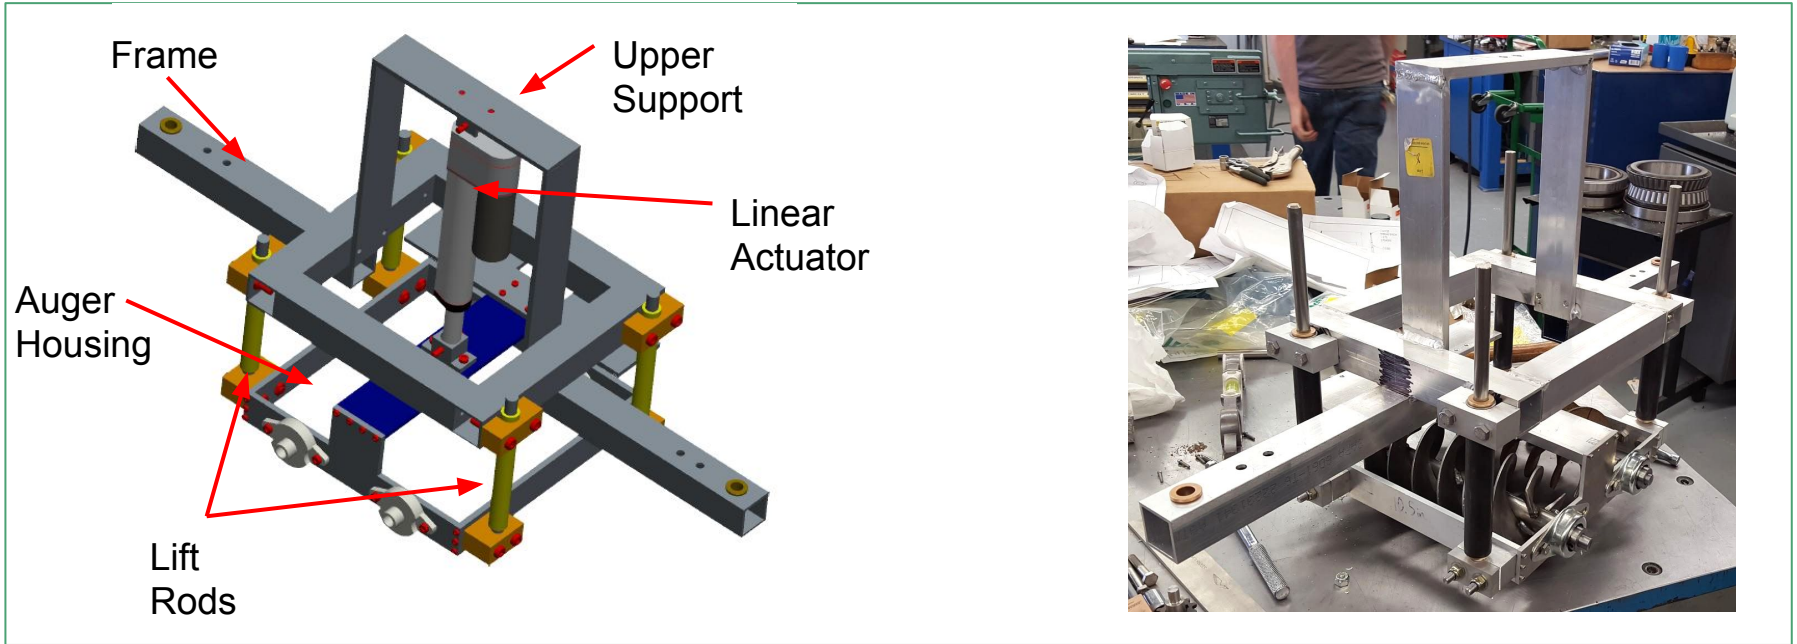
Lift System attached to Auger Housing; CAD to Actual Component.
